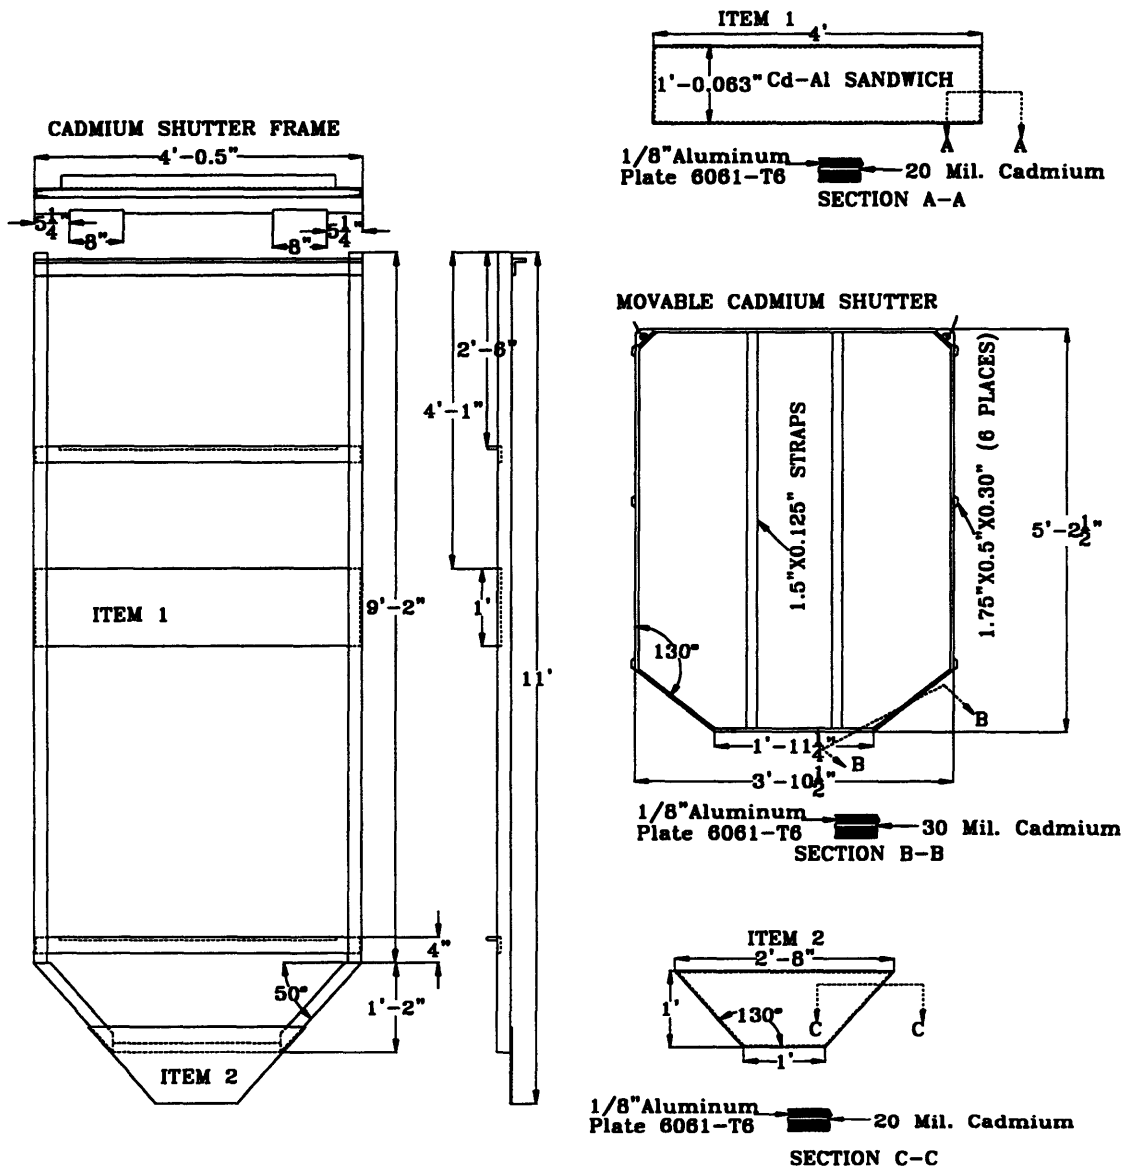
Current Cadmium Shutter and Shutter Frame (Dimensions are taken from blue prints)
